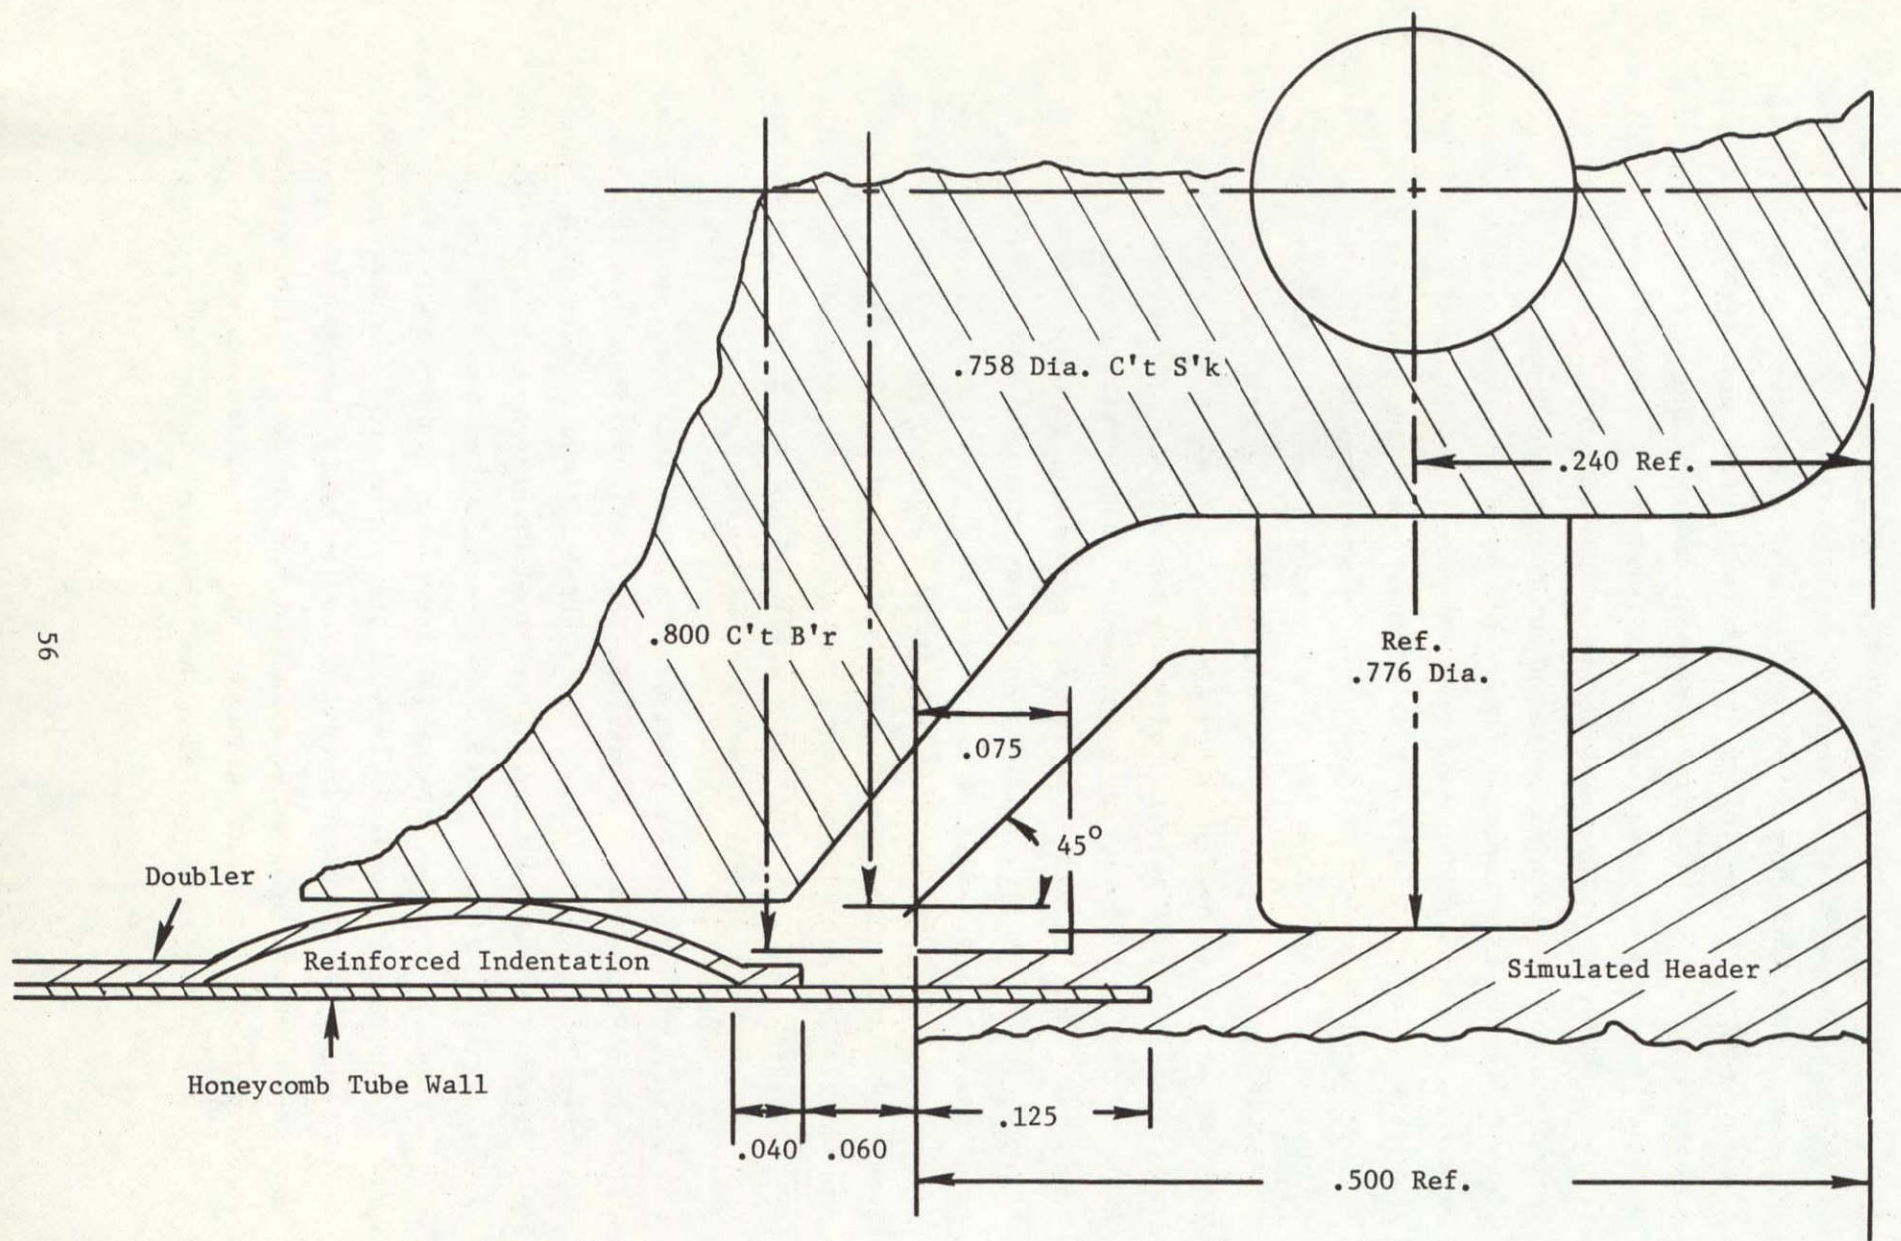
Detailed Dimensions of T-111 Simulated Header Components Prepared for Tube-to-Header GTA Welding Study (Interim Design Configuration).
